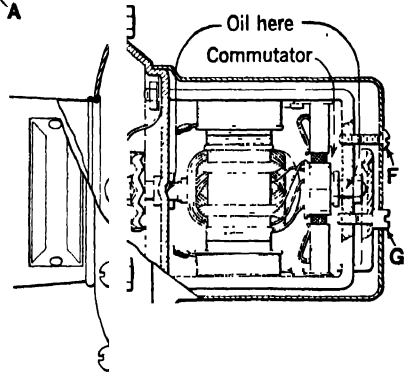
Motor-horn Care and Adjustments. (Spartan)
